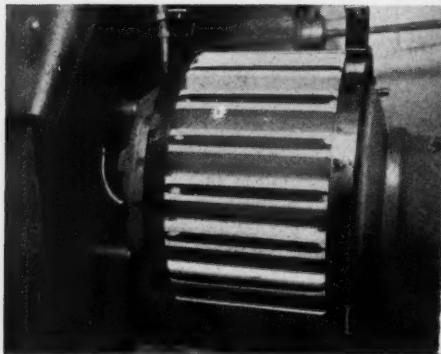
Line-welding the evaporator, which is done at a speed of 72 in. per minute. The weld must be vacuum-tight.
